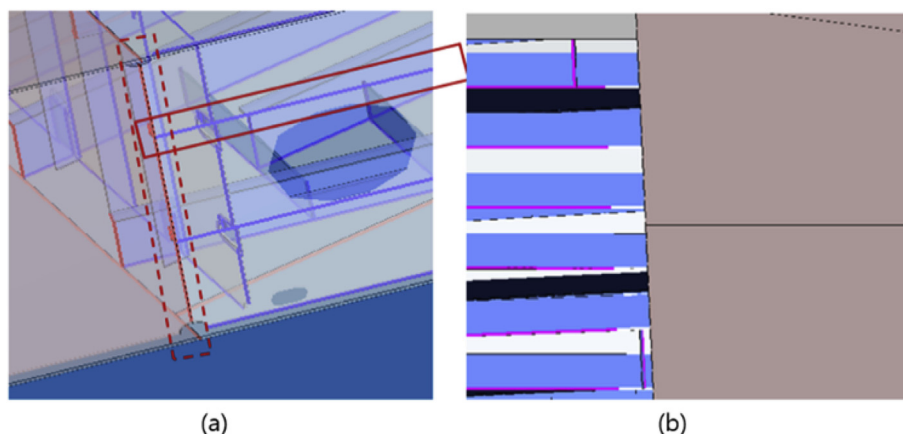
NWR (a) butt welding region; (b) stiffener welding region.
